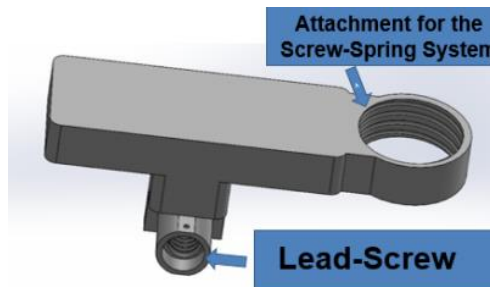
The Lead Screw and Slider of the Modular Attachment.
